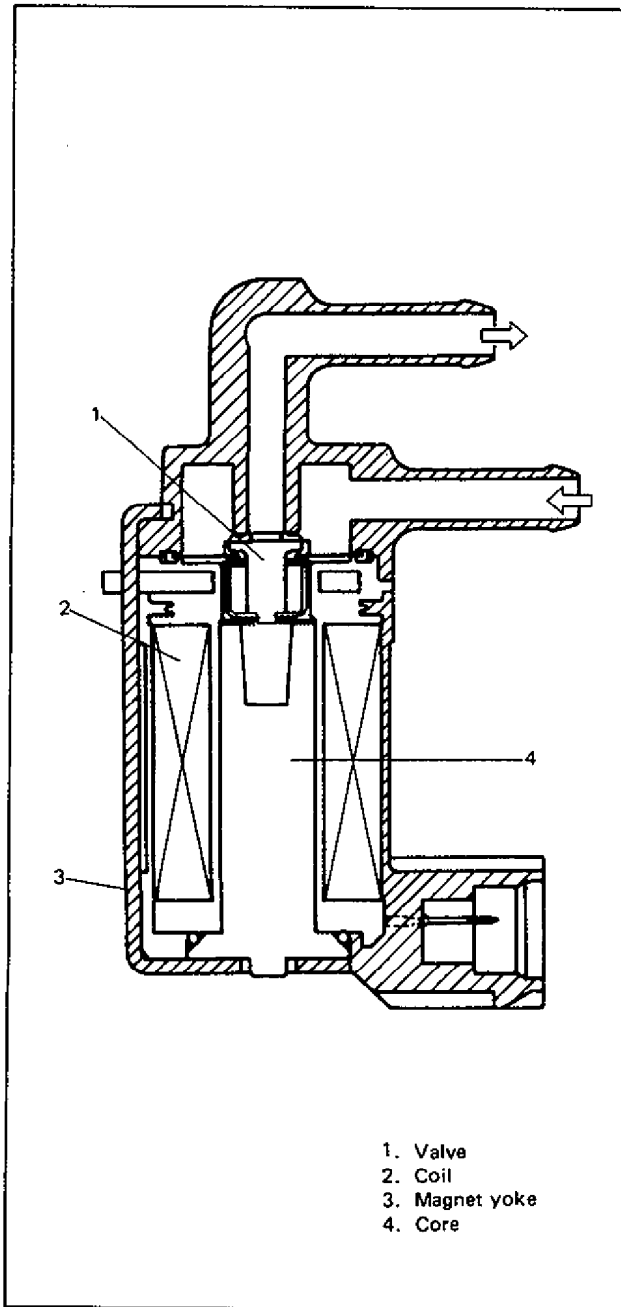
E-10-1 ISC Solenoid Valve Cross-Section
